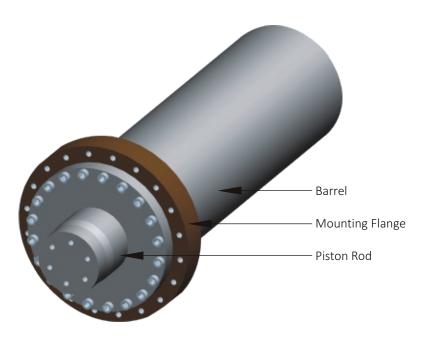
Heavy Duty Hydraulic Cylinder Bore Ø 450mm x Piston Rod Ø 300mm x Stroke 1250 mm. Working pressure at 300 bar &Test pressure 450 bar.
